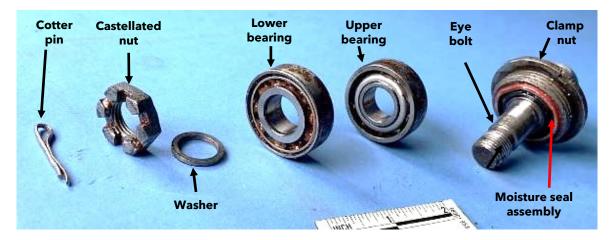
Disassembled pieces of the eye bolt assembly showing the cotter pin; castellated nut; washer; lower and upper bearing assemblies; eye bolt, moisture seal assembly, and clamp nut. (left to right).
